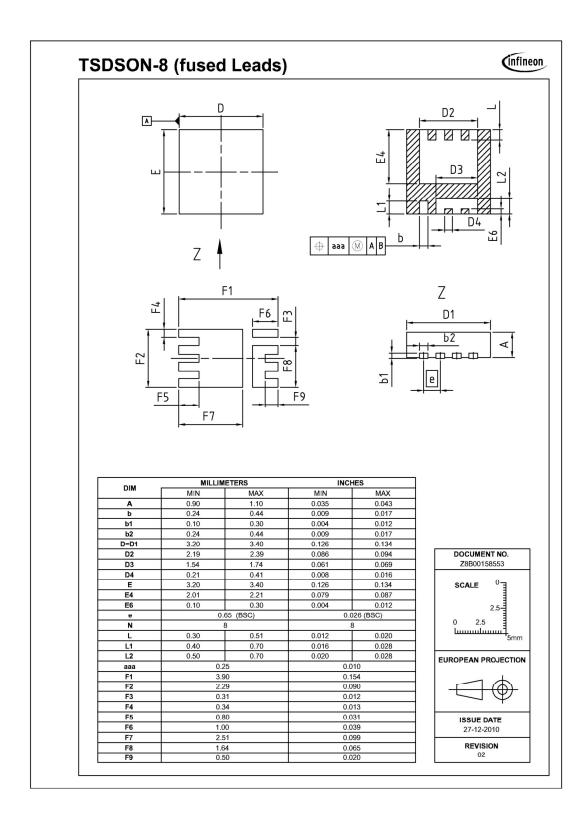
Outline PG-TSDSON-8 FL, dimensions in mm/inches
